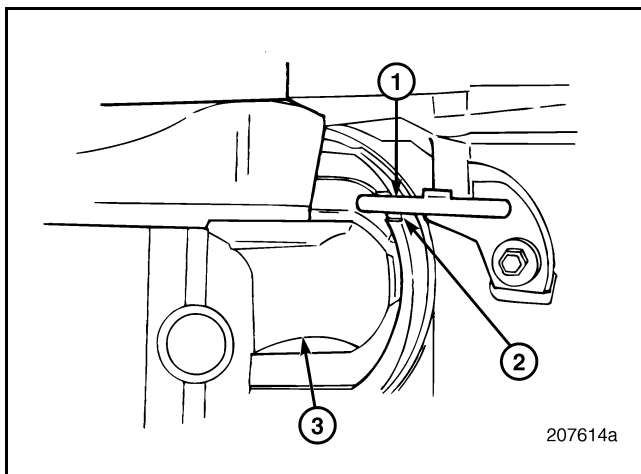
Piston Skirt/Cooling Nozzle Alignment
